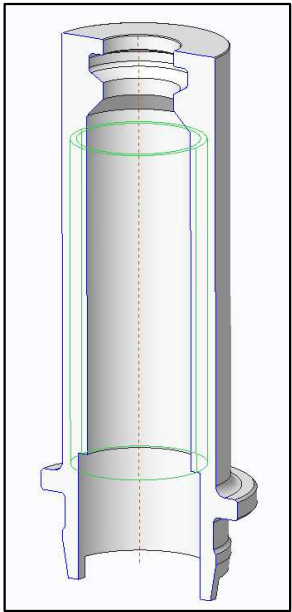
The small 17mm piston with Dynisco hole and additional O-ring mounting.
